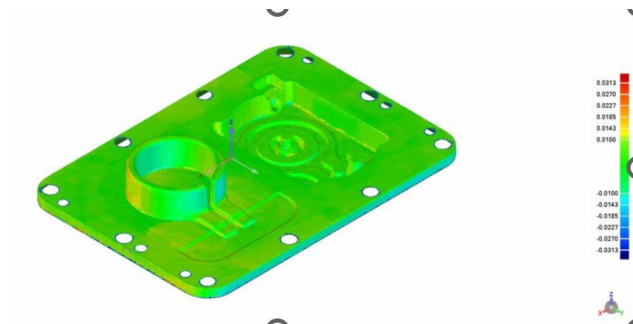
Lower aluminum mold with drainage and fill gun relief.
